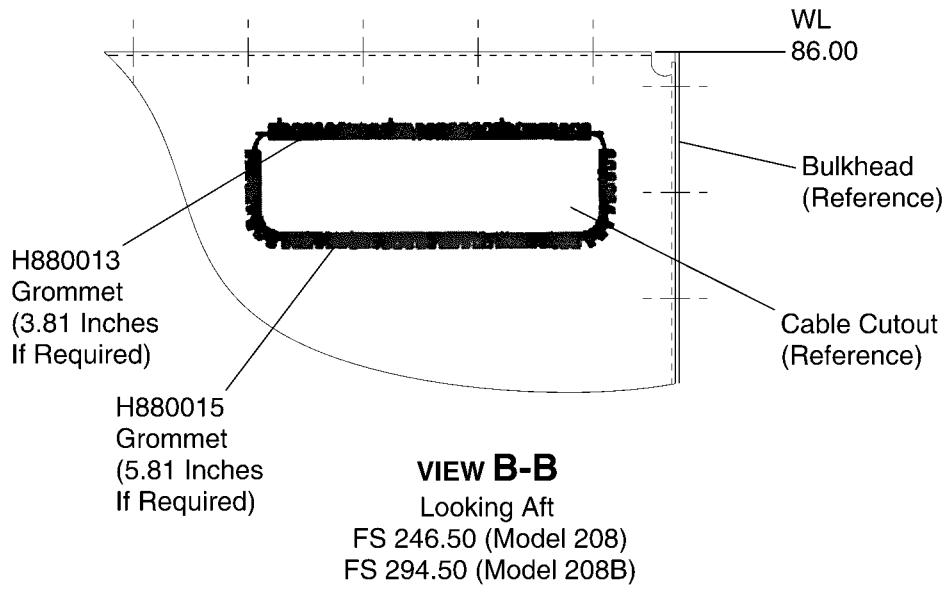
Cable Cutout Grommet Inspection//Replacement (Sheet 1)
